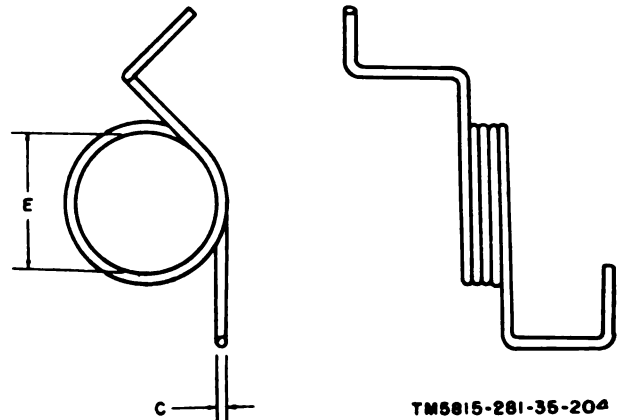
Indexing ratchet detent spring and counter pawl spring.
